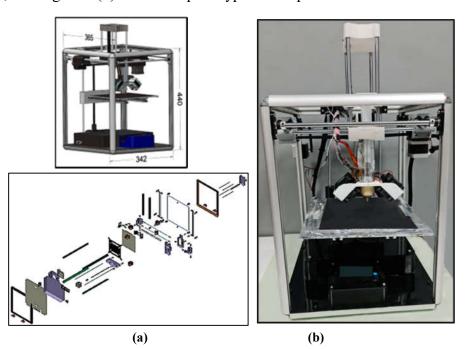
(a) Three-dimensional food printer design (b) Printer prototype
